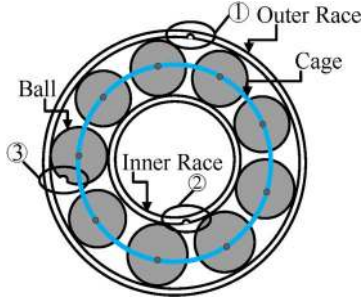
Ball bearing geometry and the possible defects.
